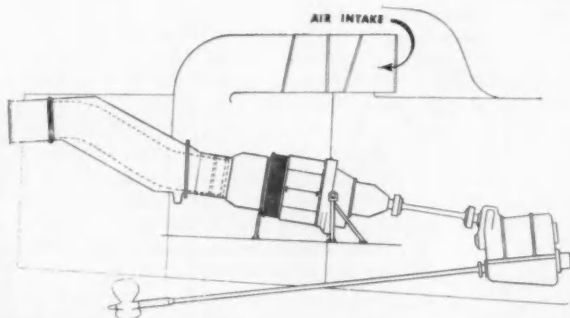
V-drive installation in "Brave" boats. Each of the three marine Proteus engines drives a propeller through a V-drive reverse and reduction gearbox.
